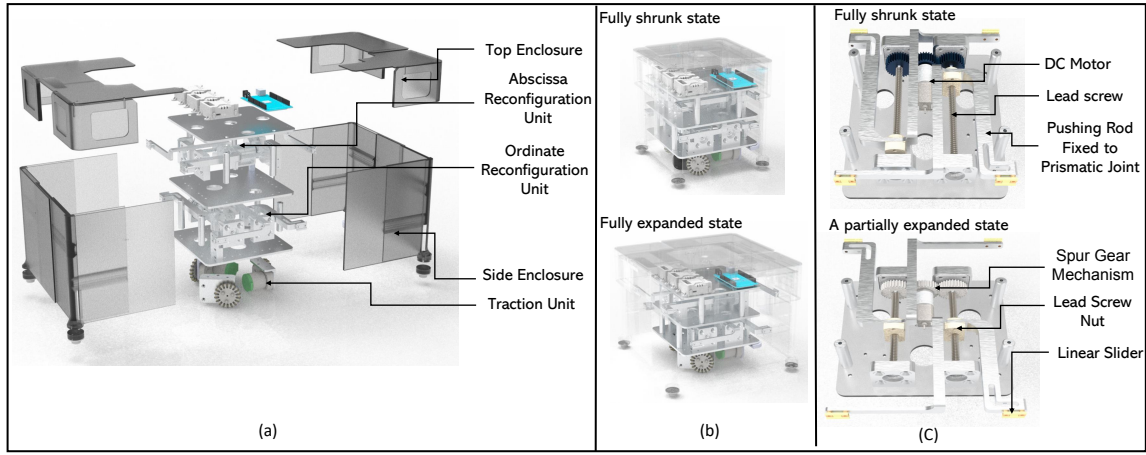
(a) Exploded isometric view of the robot. (b) 3D CAD model of the robot in fully shrunk and expand states. (c) A reconfiguration unit.
